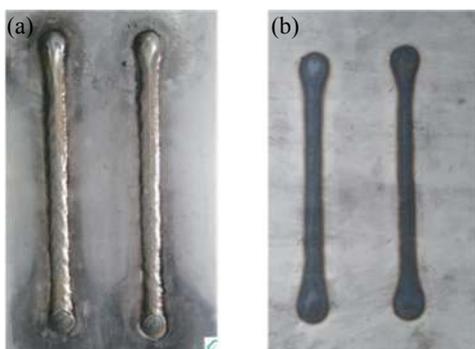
Photograph of welding seam obtained by means of the local dry method (a) Weld face appearance (b) Weld back-side appearance
